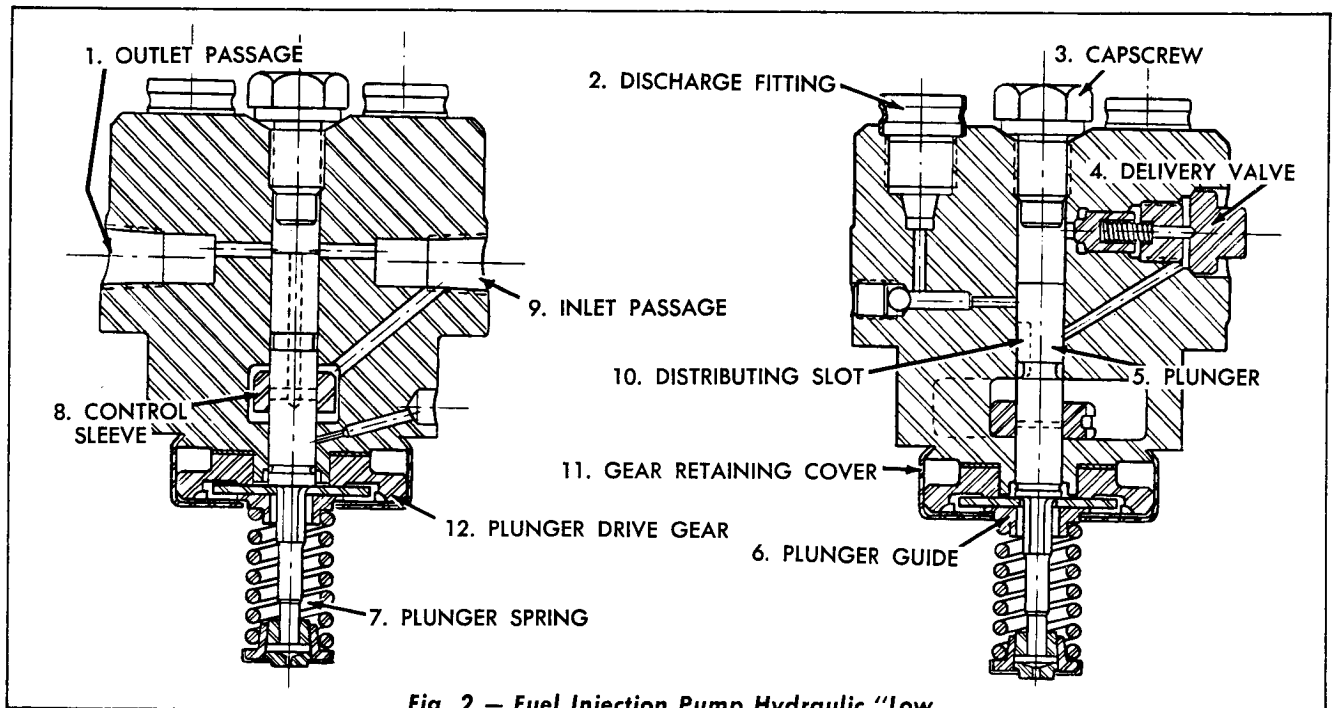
Fuel Injection Pump Hydraulic "Low Volume" Head — Sectional Views
